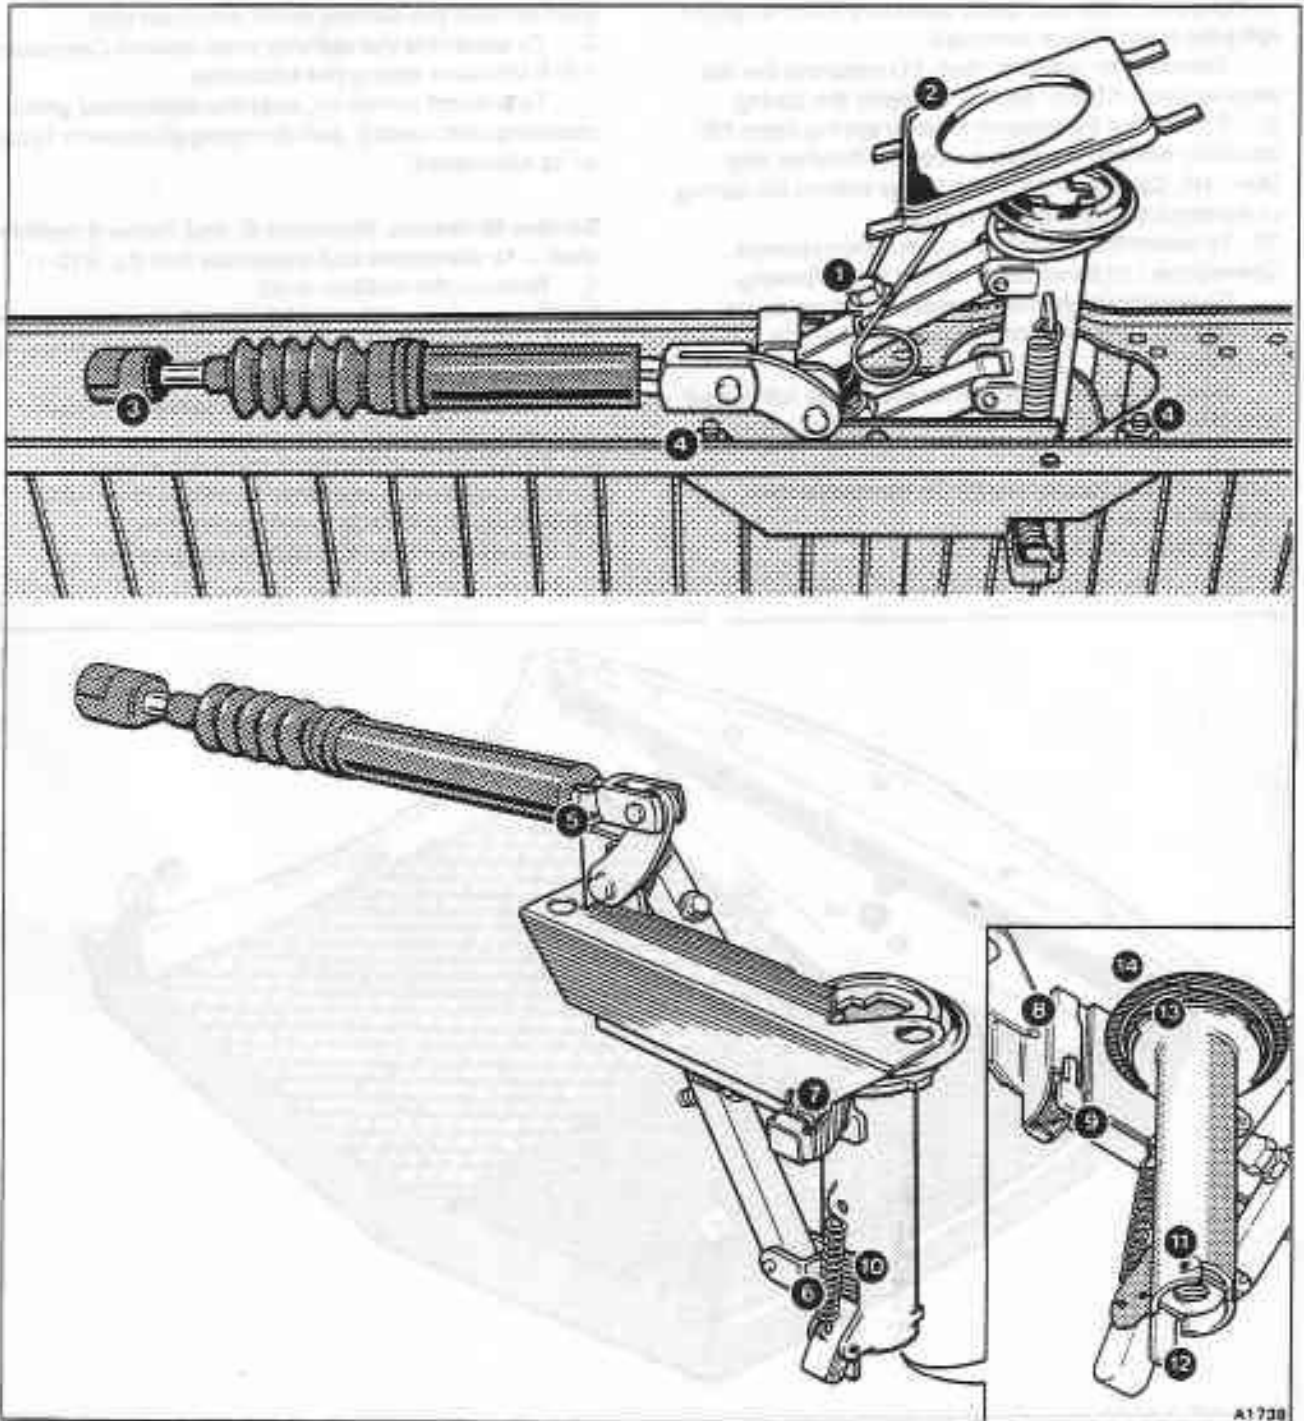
Mascot retract mechanism (gas spring damper)
